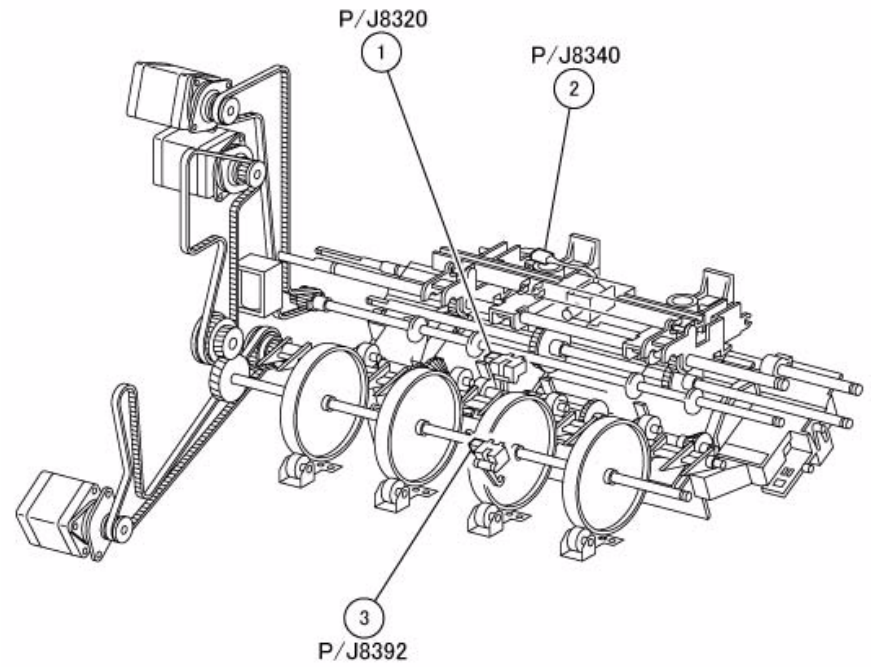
Adv./Prof. Finishers - H-Transport Assembly (j0sr7137)
